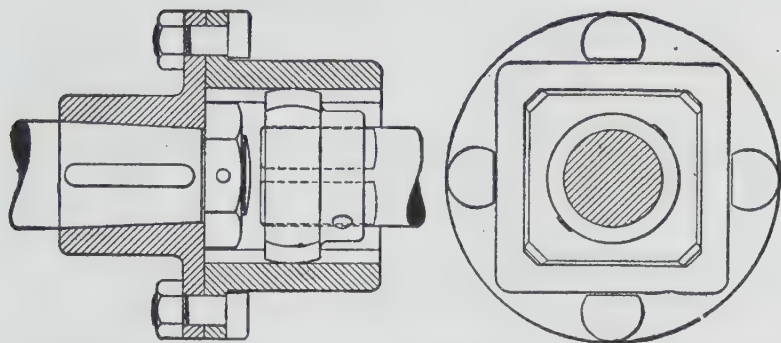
SQUARE BLOCK TYPE OF UNIVERSAL AND SLIP JOINT.
